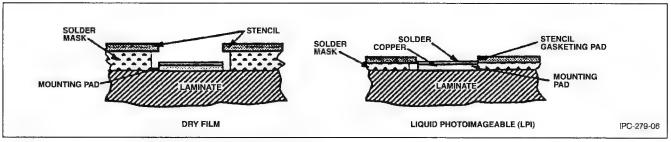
Impact of Solder Mask Thickness on Stenciling
